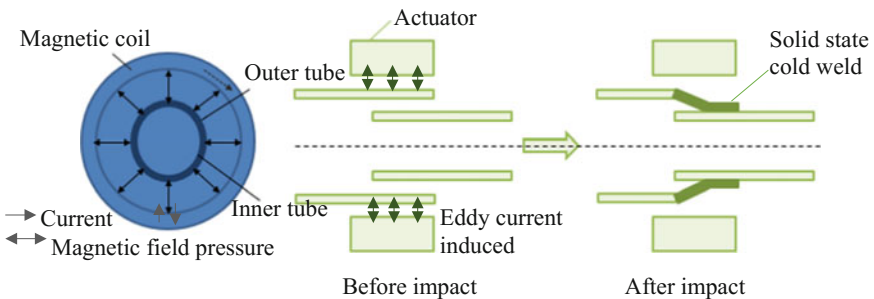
Process principle of magnetic pulse welding [19]
